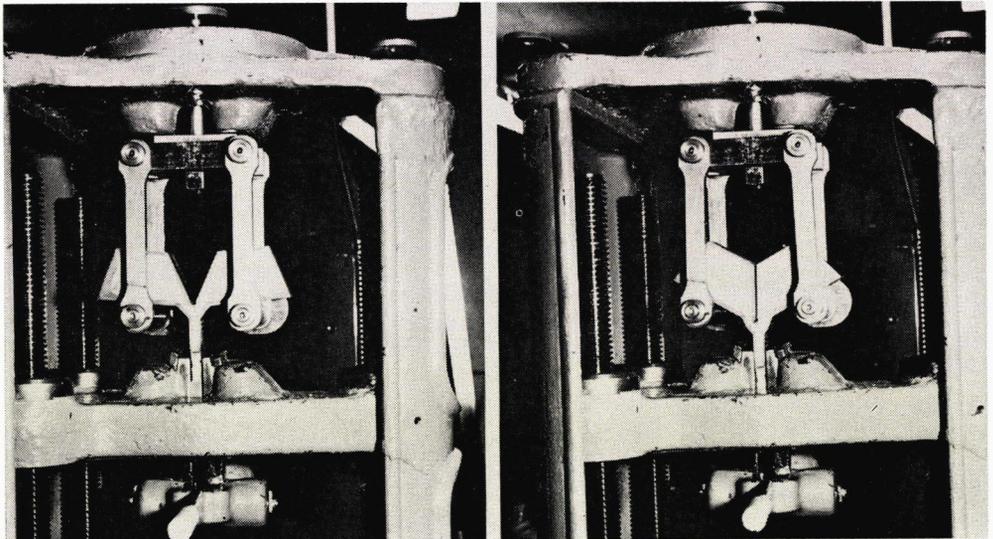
Testing fixture showing (left) initial and (right) final stage of sample with no failure. Spacers are used to prevent lower linkage from moving (nearest spacer removed to show test specimen).
